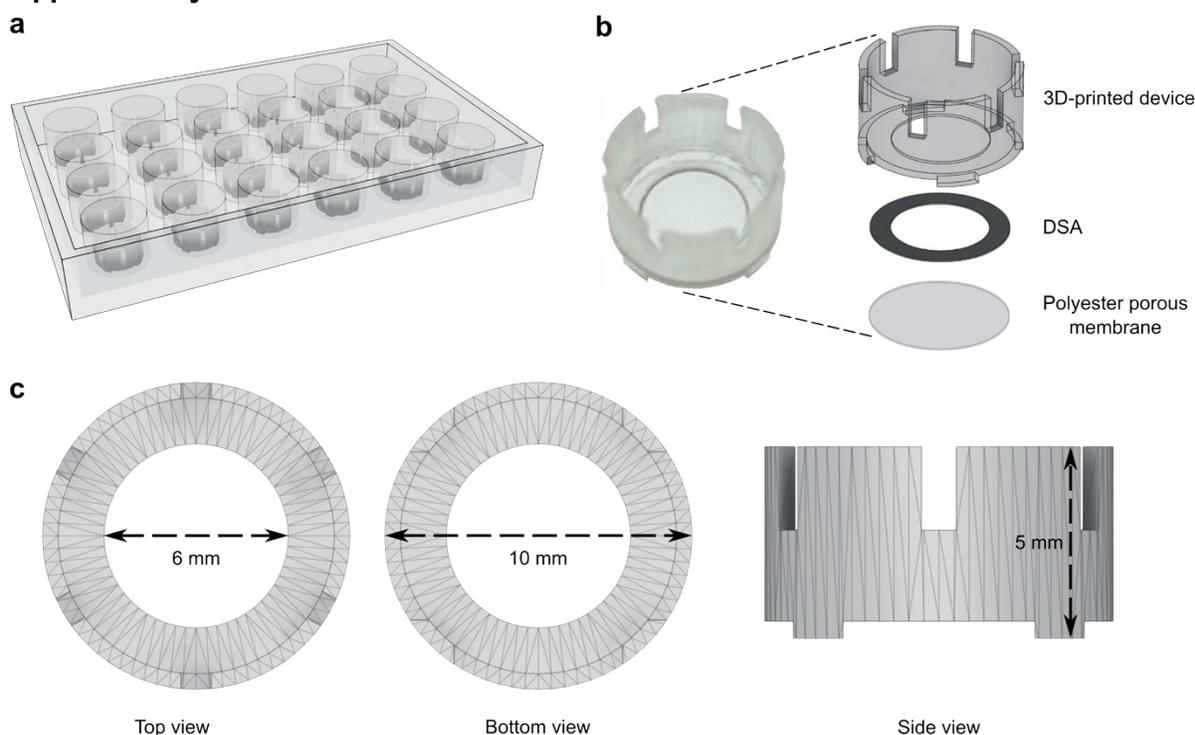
3D-printed devices. a, 3D-printed holder devices are compatible with 24-well microtiter plates. b, The composition of 3D-printed holder devices. c, Detailed dimensions of 3D-printed holder device.
